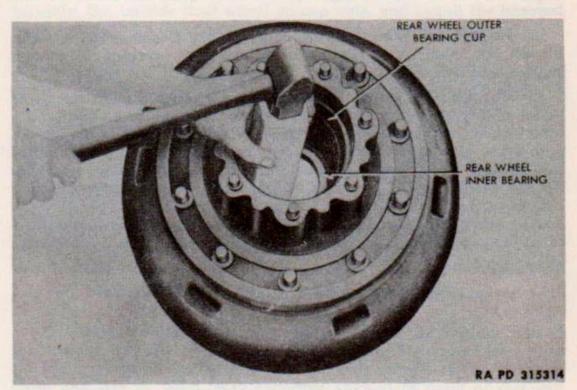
Rear Wheel Bearing Cup and Oil Seal Removal
